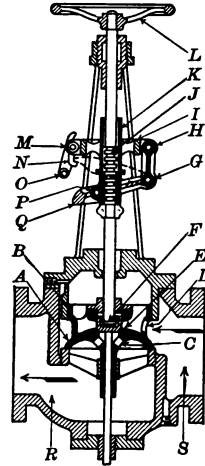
COMBINED THROTTLE AND EMERGENCY VALVE
